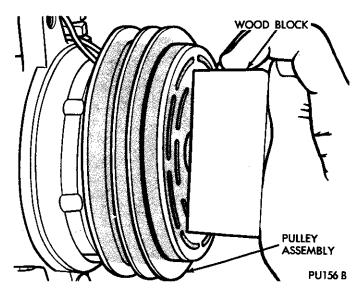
Installing Pulley Assembly, C-171 Compressor
